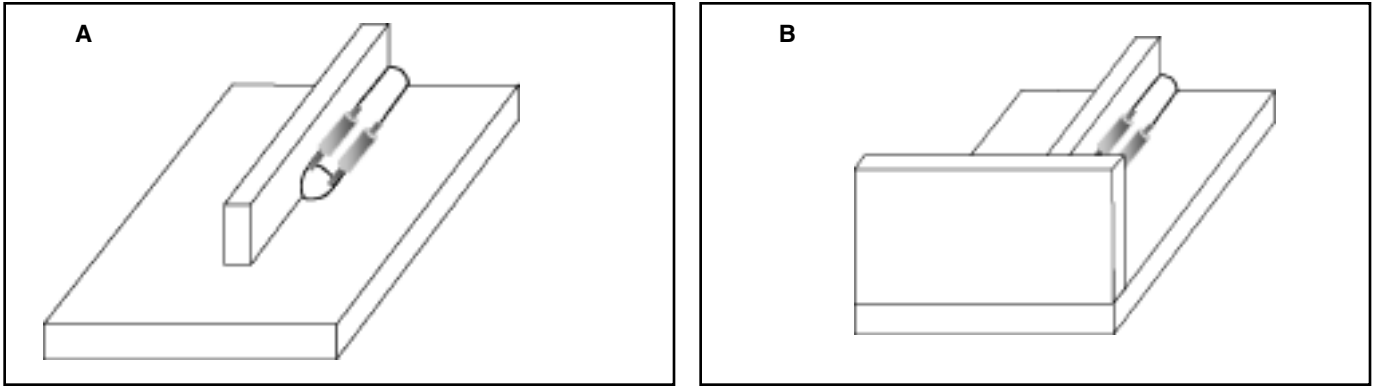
Weld structures for simulation. A — Open fillet joint welding; B — closed fillet joint welding.
